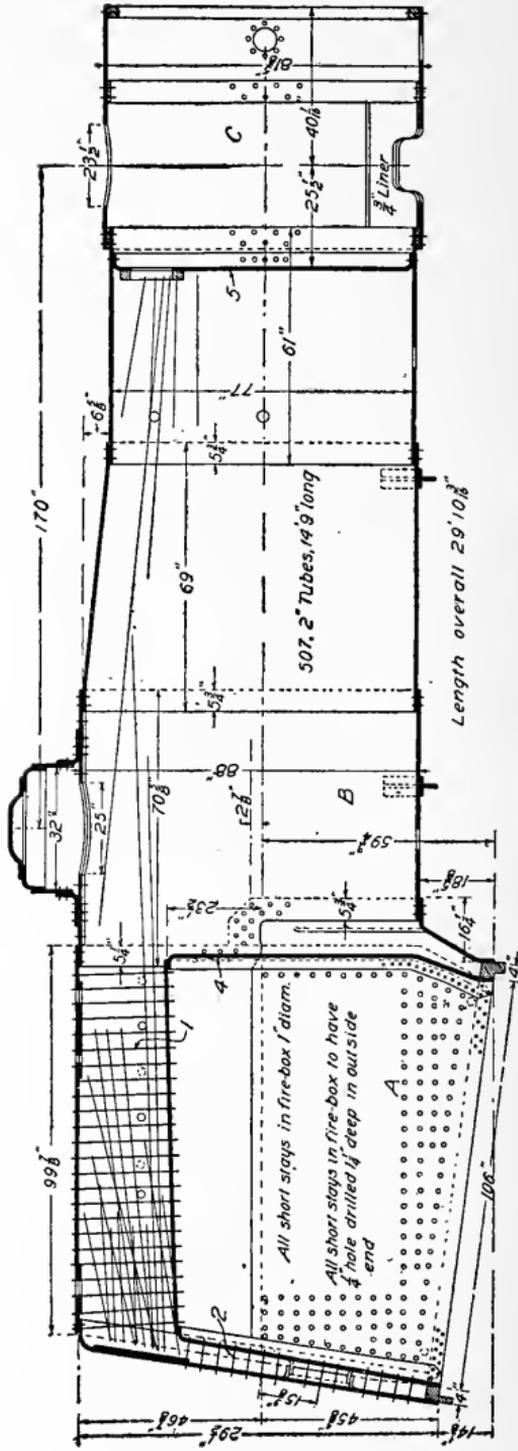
Detailed Drawing of Modern Locomotive Boiler
